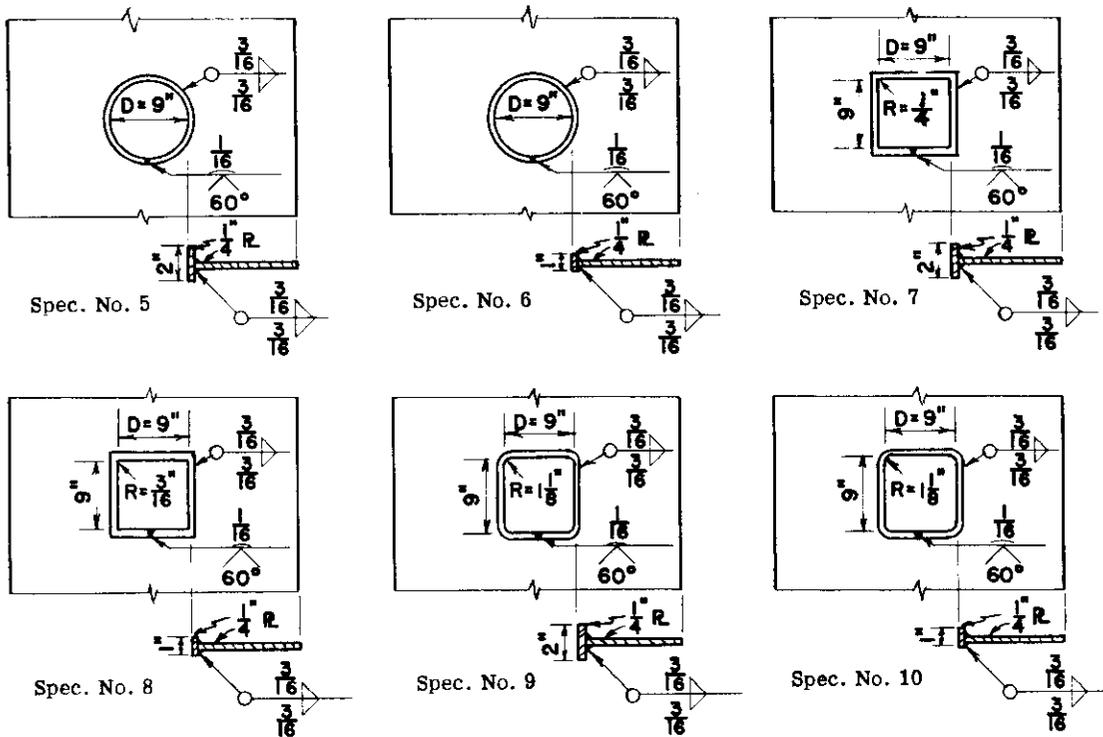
Details of Plates with Openings Reinforced by a Face Bar.
